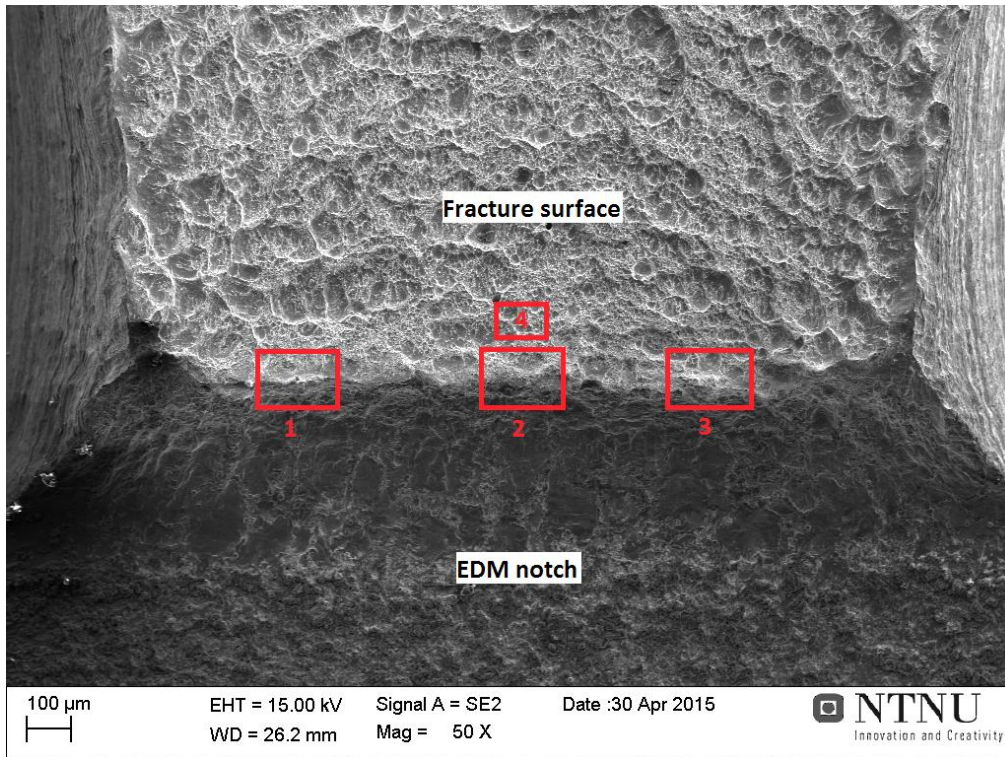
Sample B, test 3, fracture surface on BM section of specimen.
